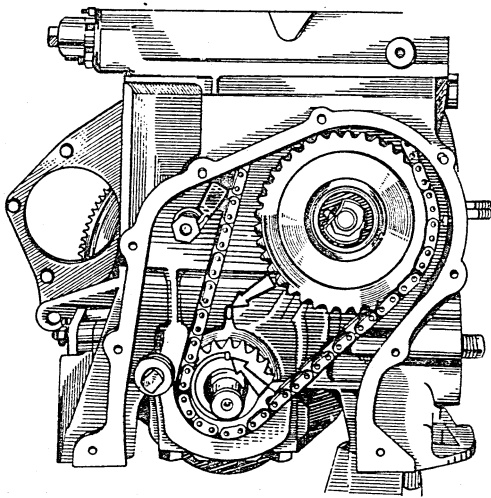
Alignment of Timing Marks on Crankshaft Sprocket and on Cylinder Block
